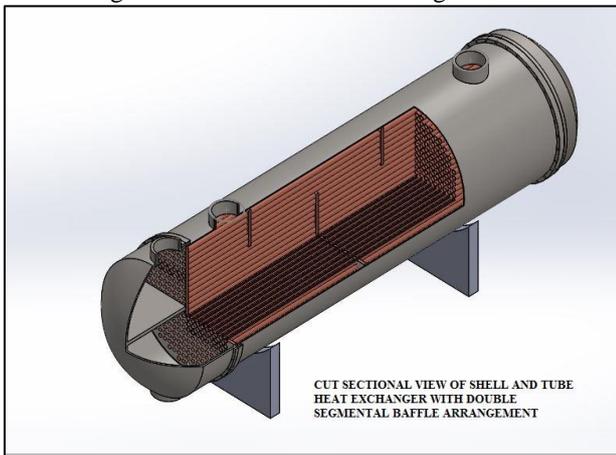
Cut-sectional view of modelled shell and tube heat exchanger with double segmental baffle arrangement
